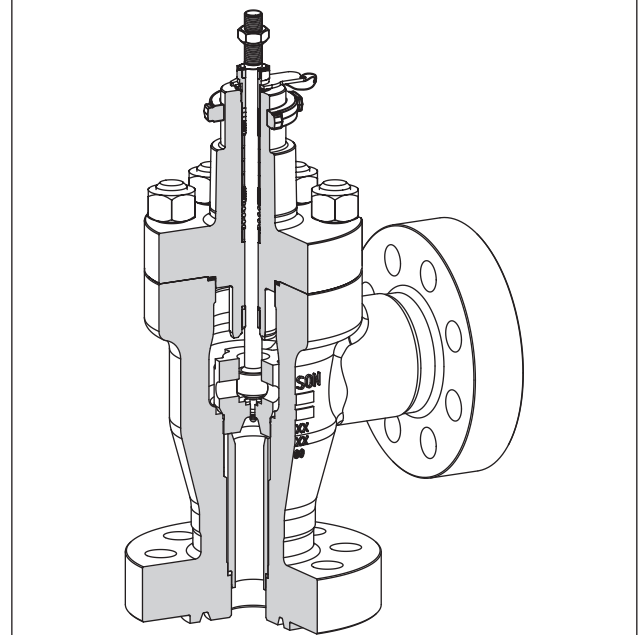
Type 3256 Angle Valve with ZT-1-II Trim
